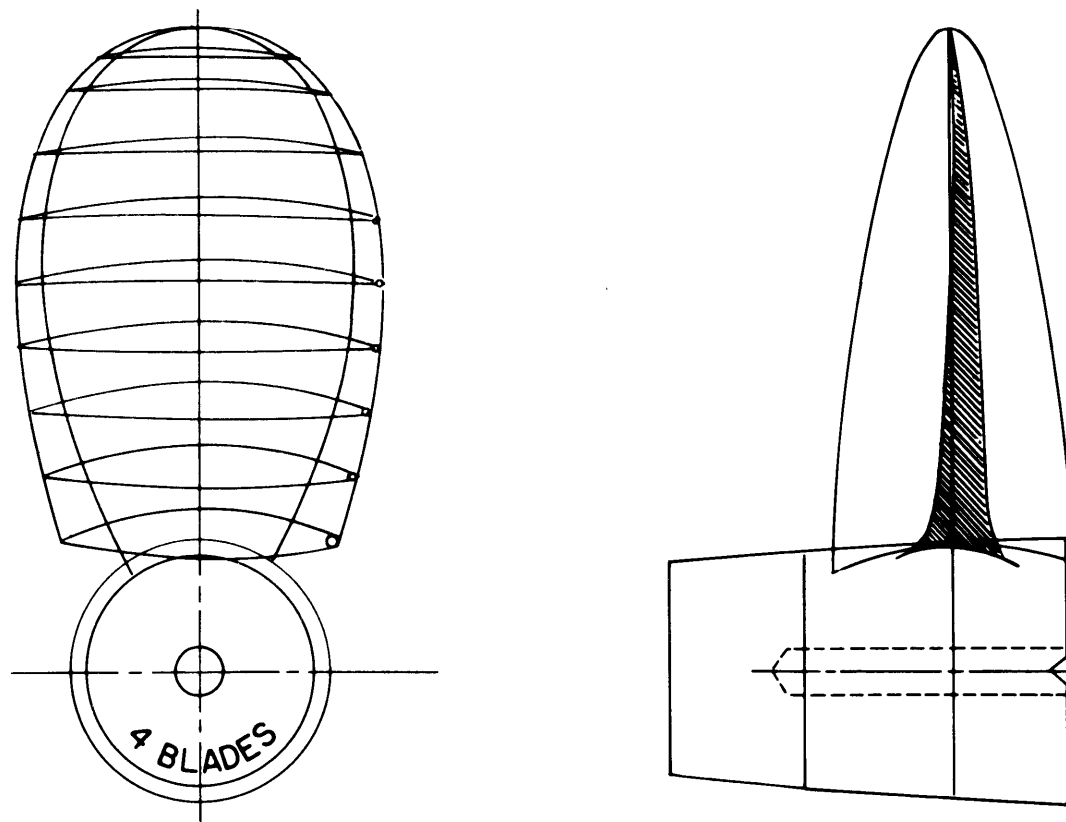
(b) - Drawing of the Wake-Adapted Propeller
